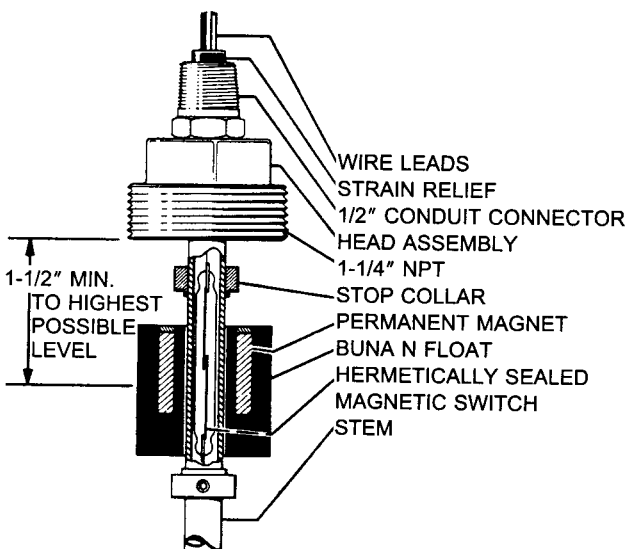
EXPLODED VIEW OF MOTOR COOLANT FLOAT SWITCH
